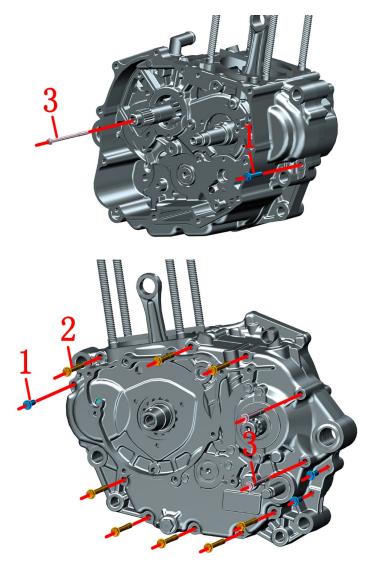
CRANKCASE		Crankcase Split 1	CHK	Q
